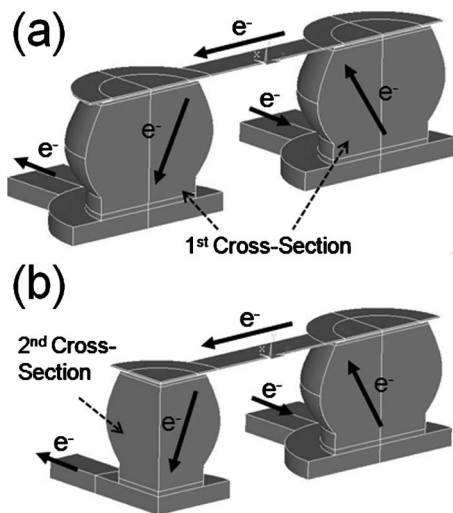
Three-dimensional diagram for the solder joints with the direction of electron flow (a) After first cross section. (b) After second cross section.
